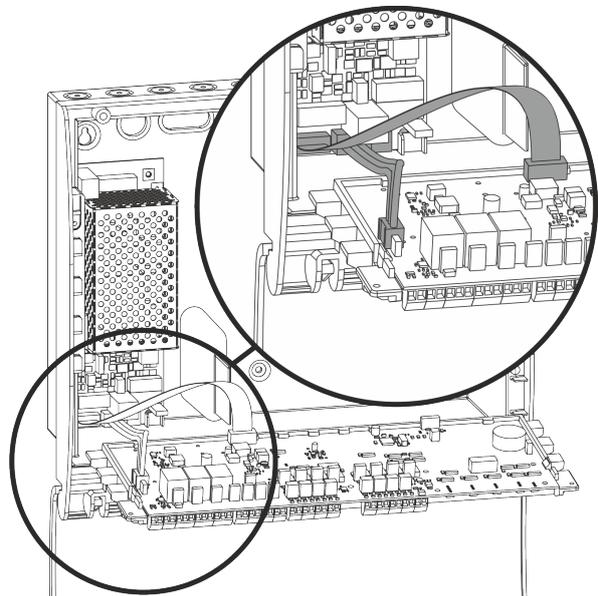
Removing the PCB Shelf & Disconnecting the PSE
